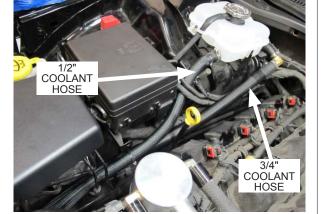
y: Install coolant hose assembly and route towards electric water pump
